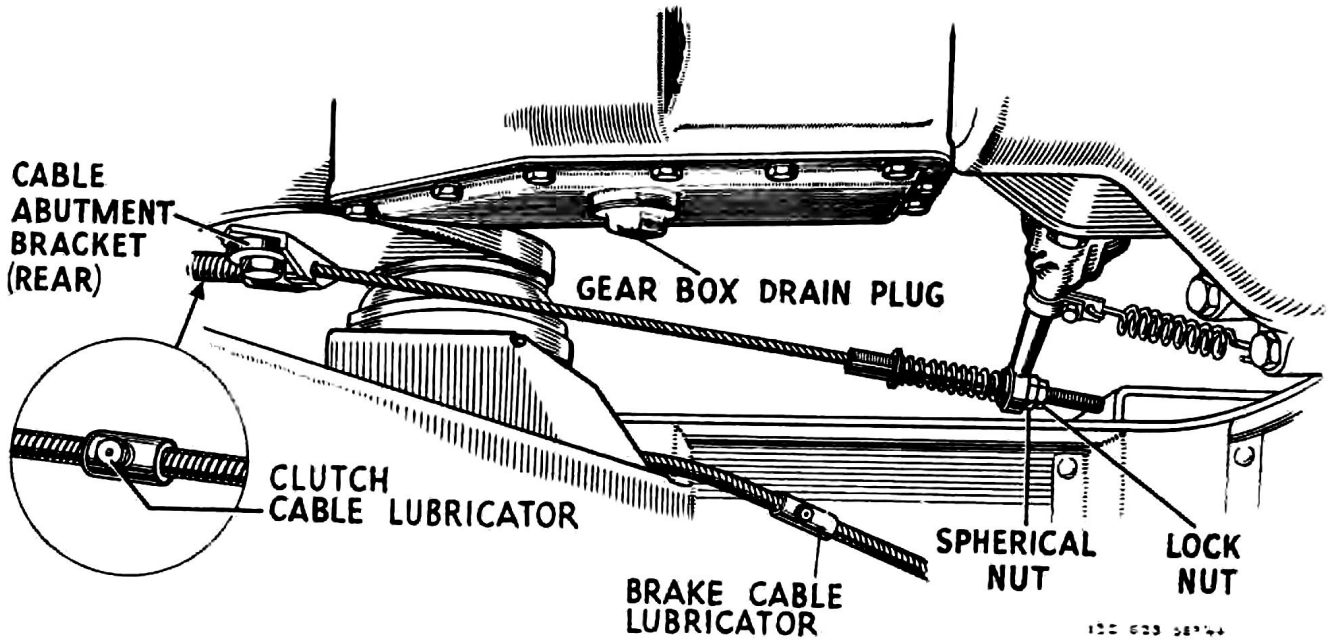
CLUTCH PEDAL ADJUSTMENT.
